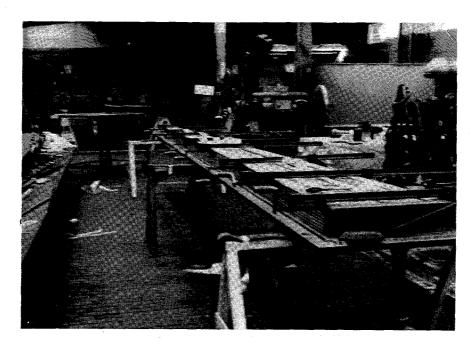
Final compaction of all internal parts of front spar tool prior to cover.
